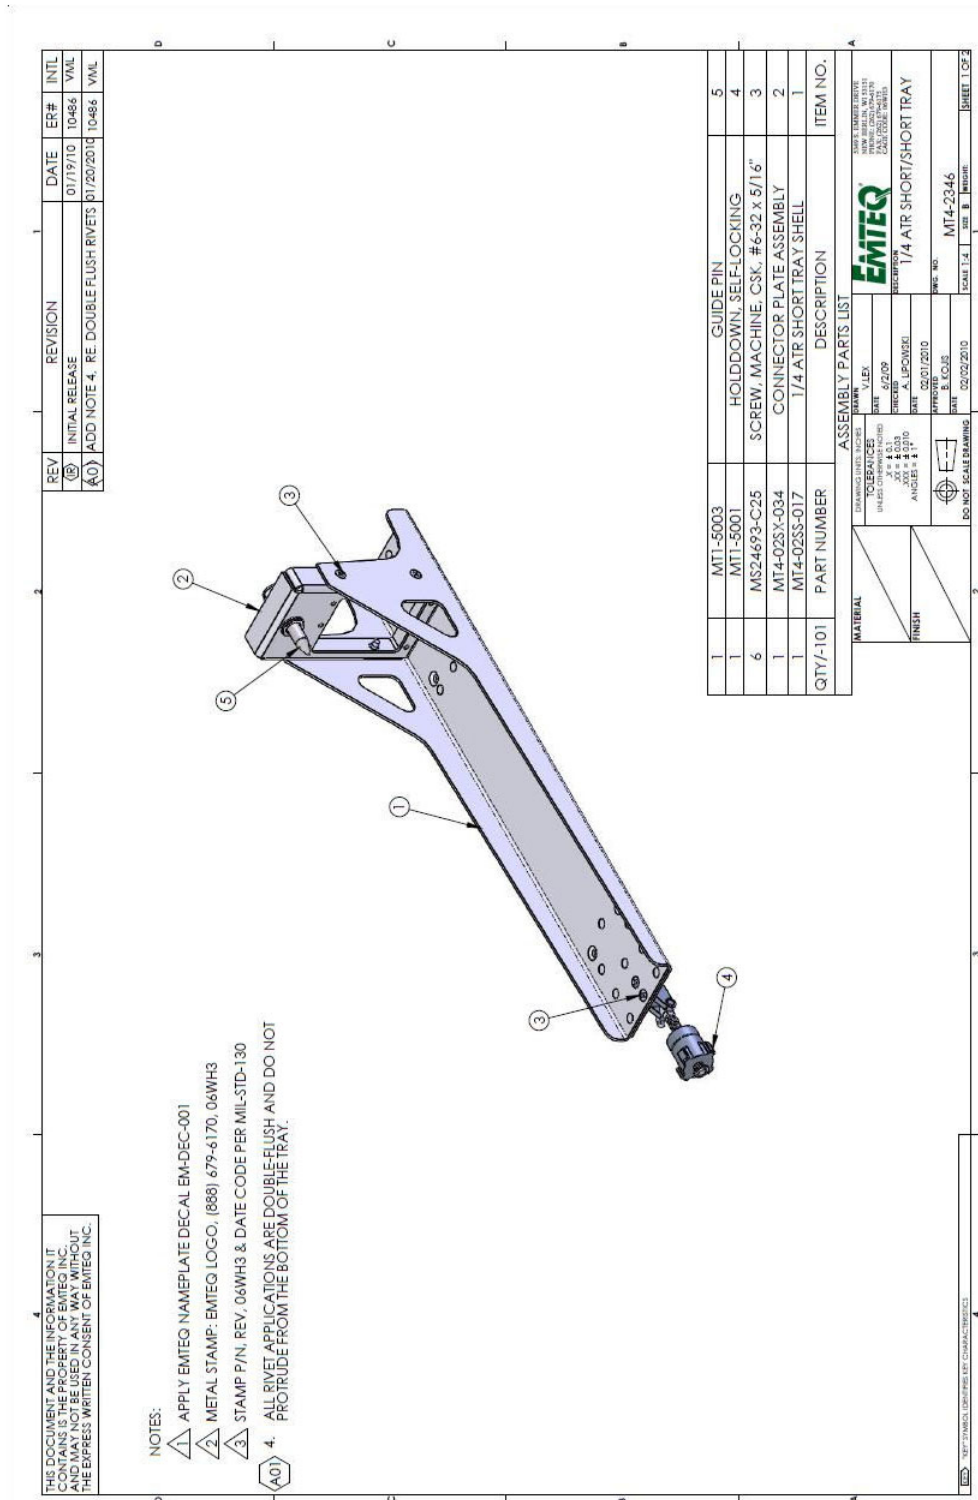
Outline drawing: SBU tray: EMTEQ MT4-2346-101 (page 1)
